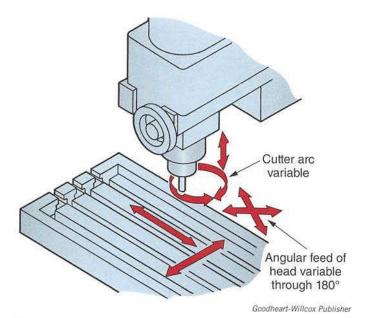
Spindle movements possible on a rotary-head vertical milling machine. Milling machines with CNC capabilities are replacing this type of machine.
